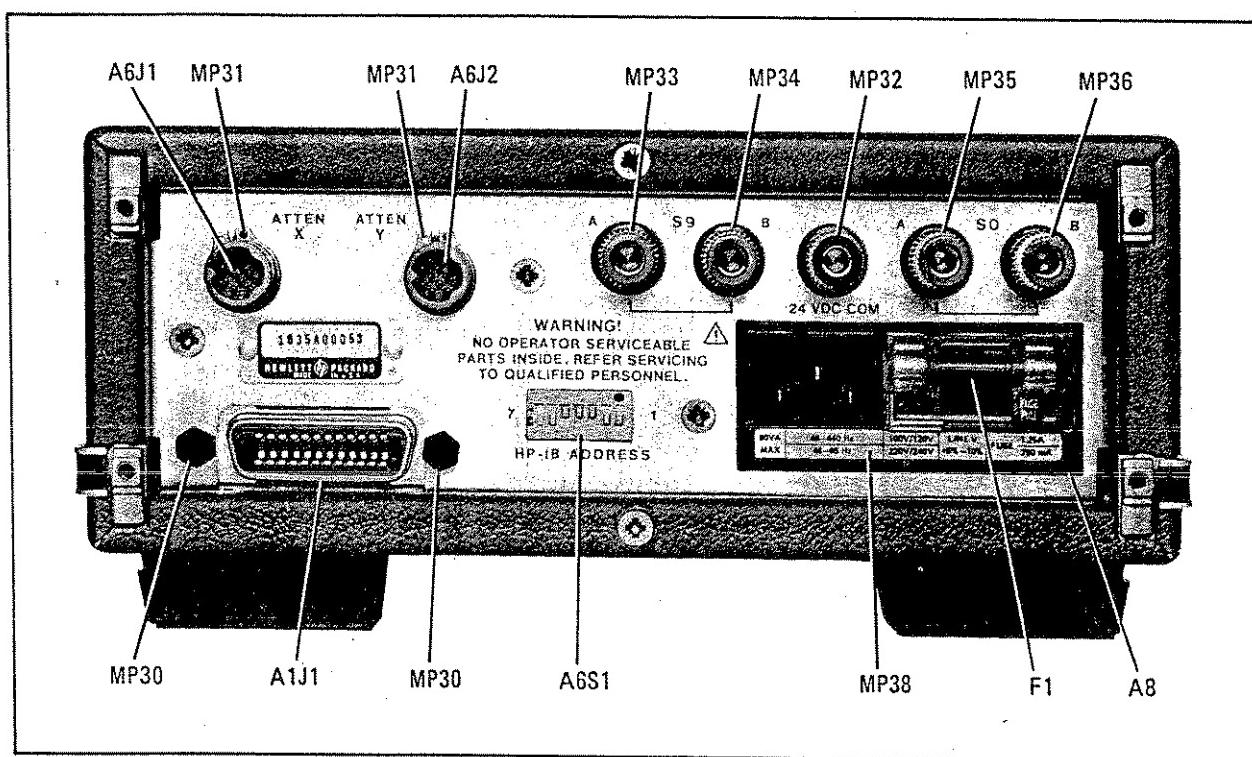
Rear Panel Mechanical Parts (P/O CHANGE B)
